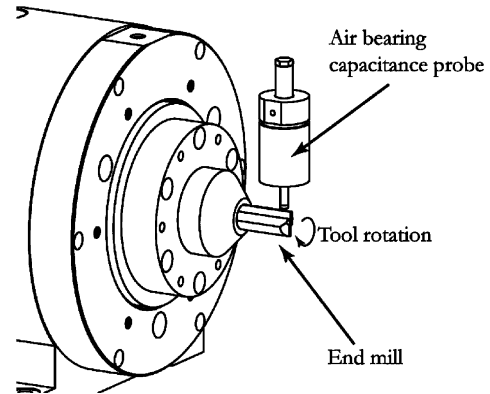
End mill radial runout measurement using capacitance probe setup.
